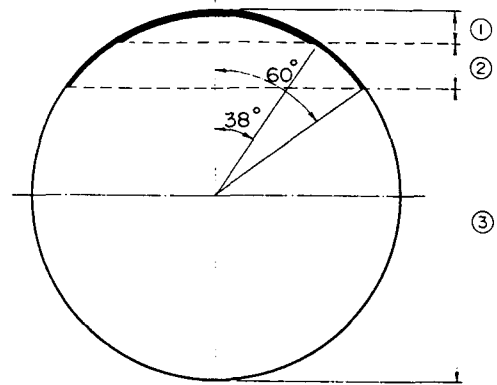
Details of welded joint and fatigue crack shape.
